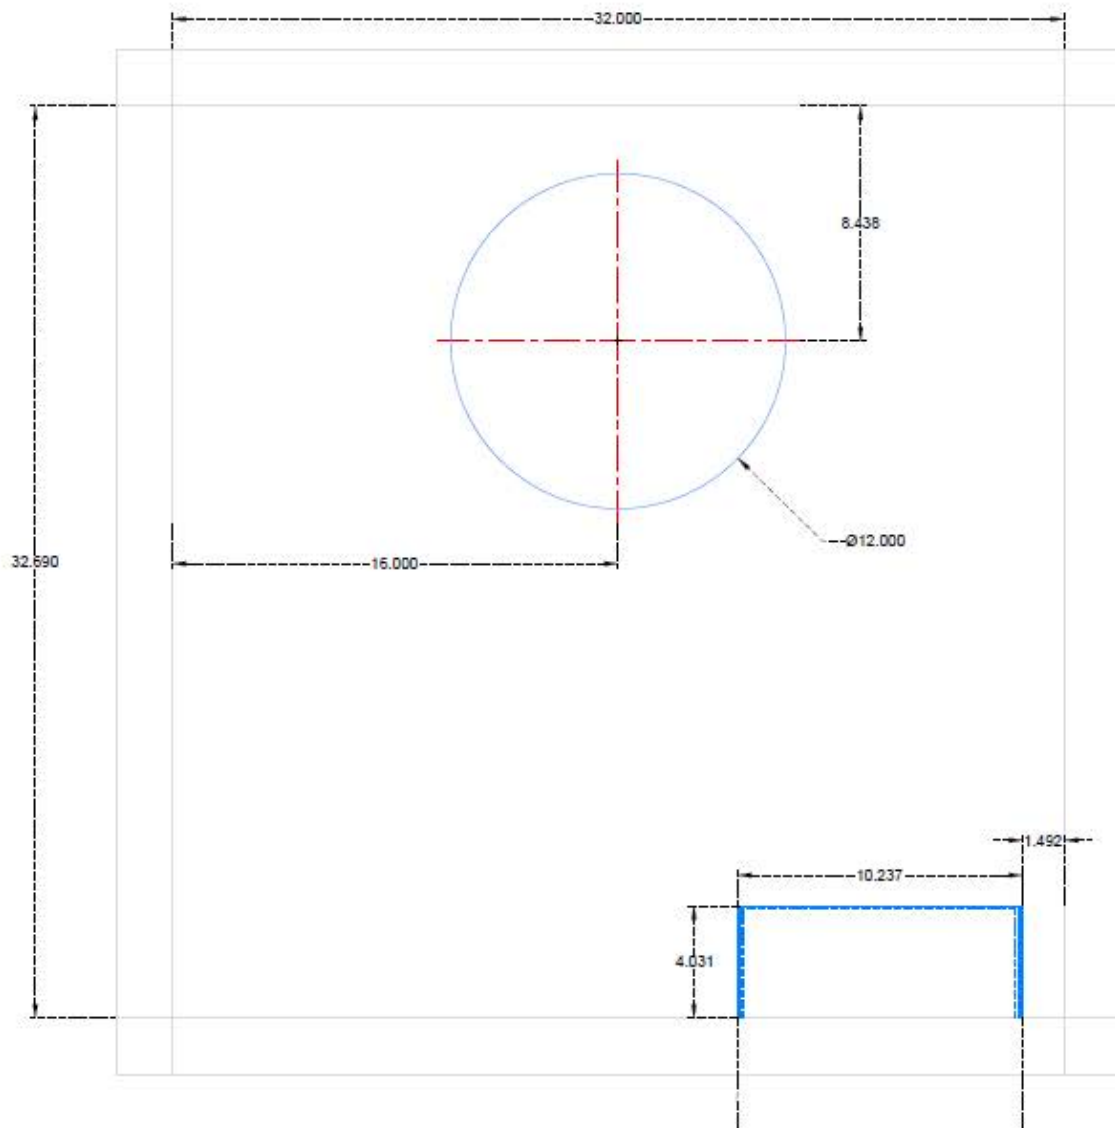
As-built dimensions of outlet plenum (side view; in inches).
